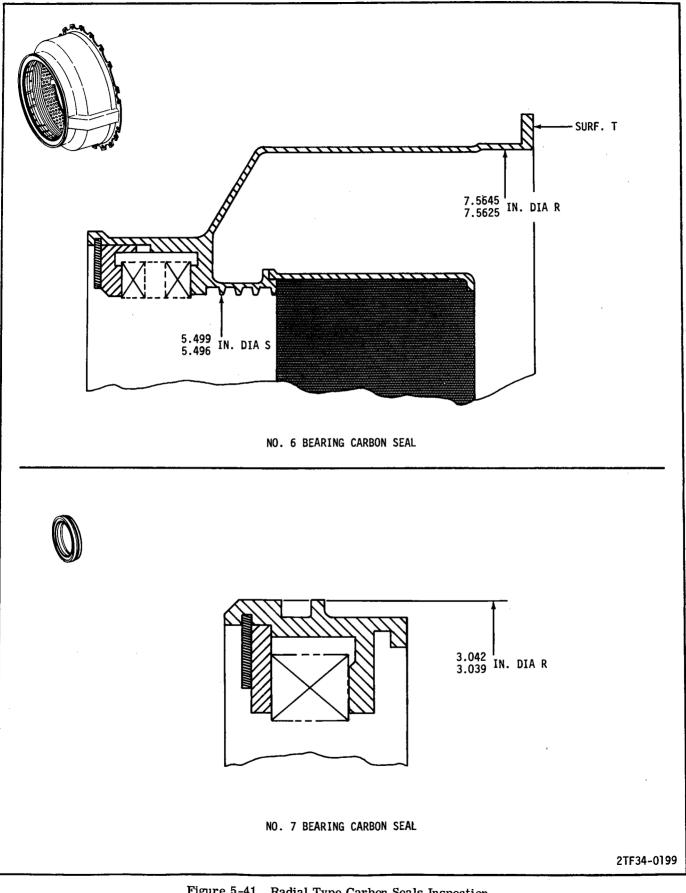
Radial Type Carbon Seals Inspection (Sheet 2 of 2)
